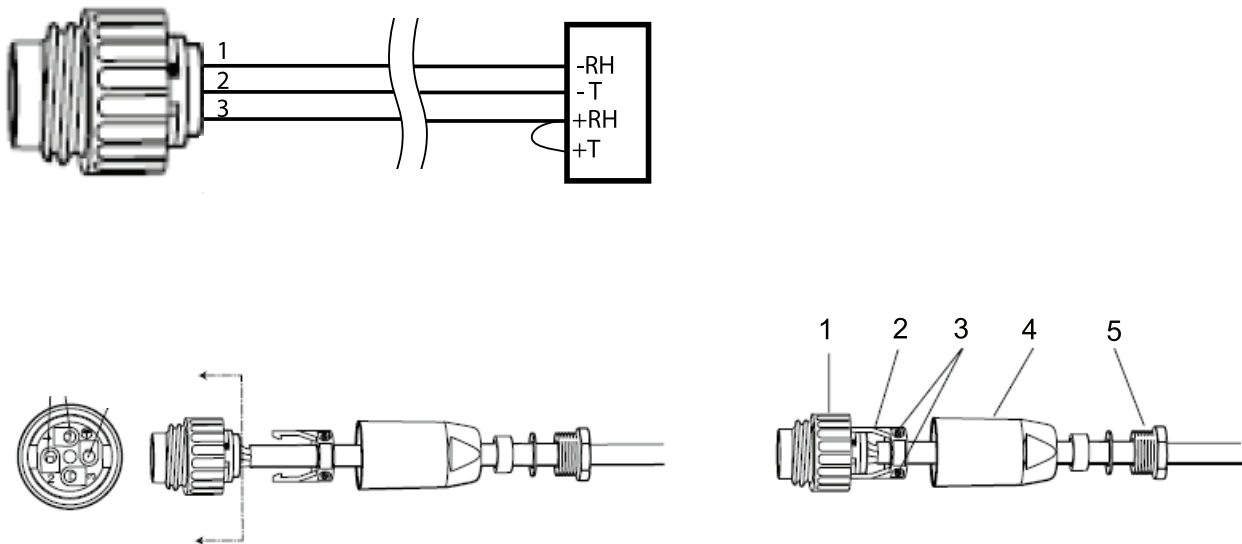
Connection of leads and humidity sensor connection kit assembly
